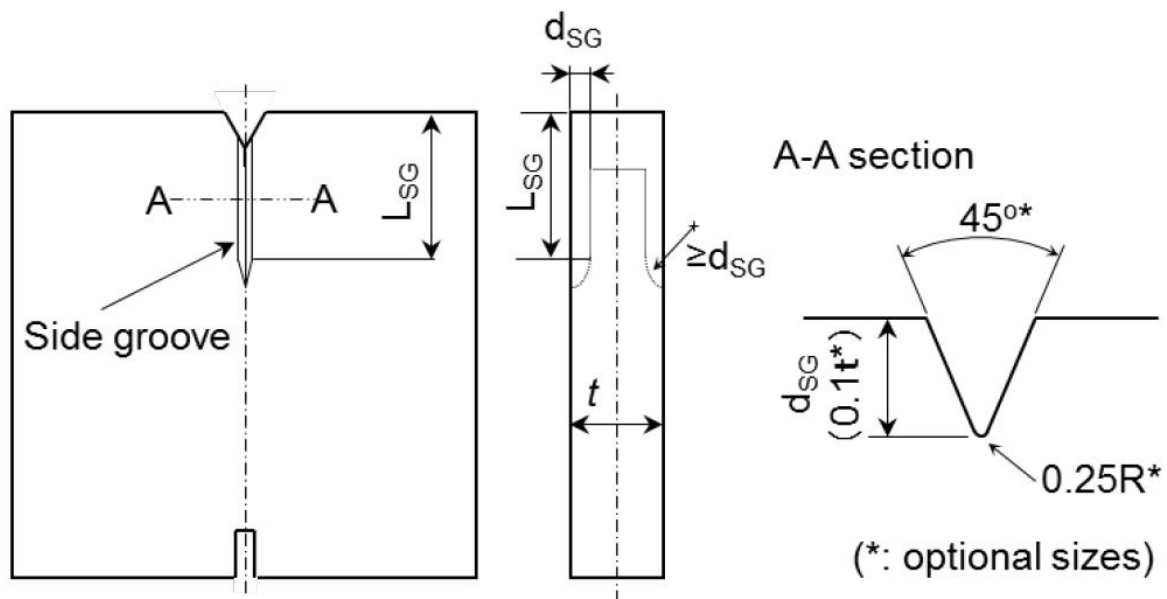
Side groove configuration and dimensions
